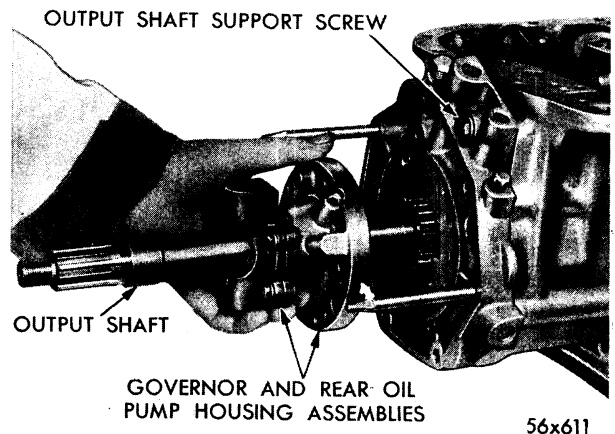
Removal and Installation of Governor and Rear Oil Pump Housing Assemblies
